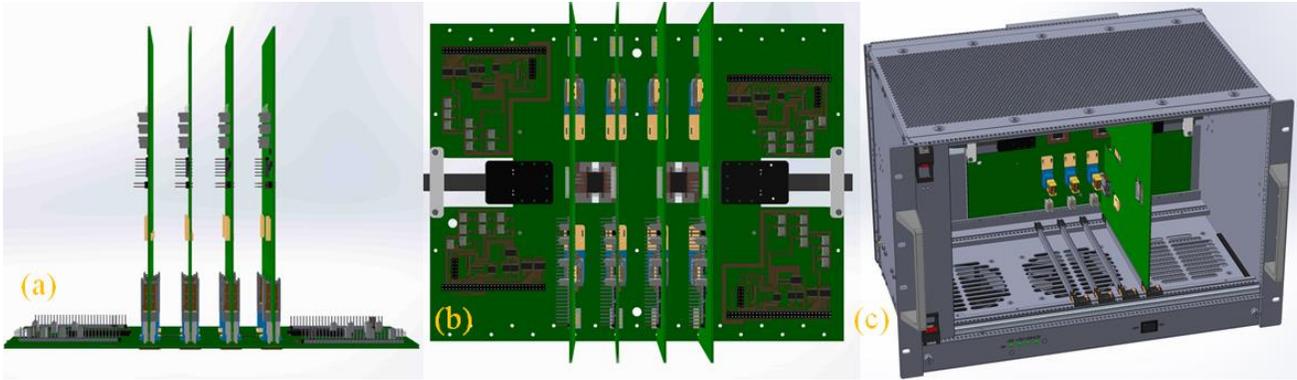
a) side and b) top-view on optical backplane with four insert line-cards, c) backplane and one plugged line-card mounted in 7U chassis.
